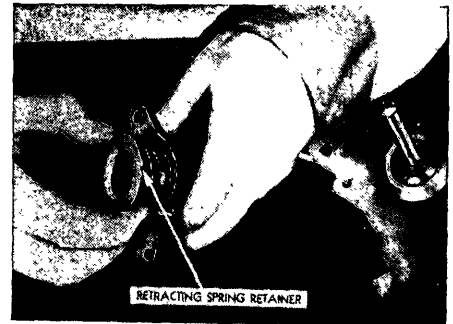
Install front band release piston into cylinder, and the booster spring over band release piston. Place retracting spring retainer over piston stem on booster spring
